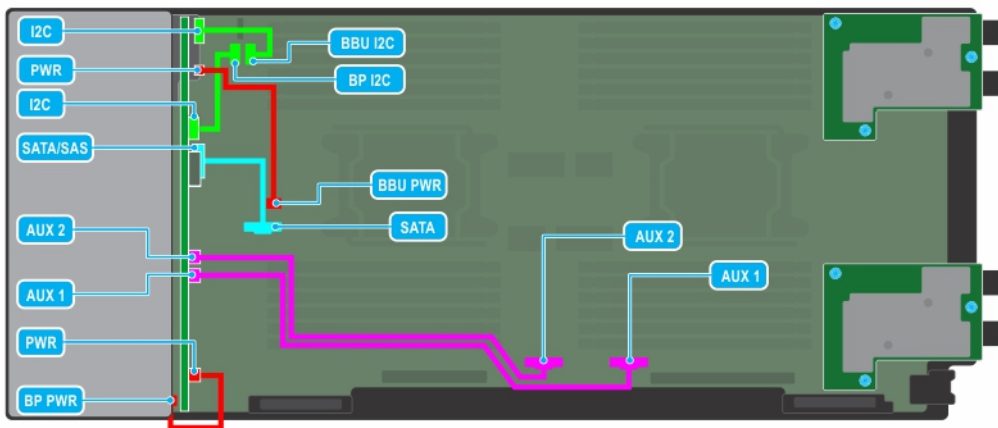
Cable routing - 6 x 2.5 inch drive backplane
